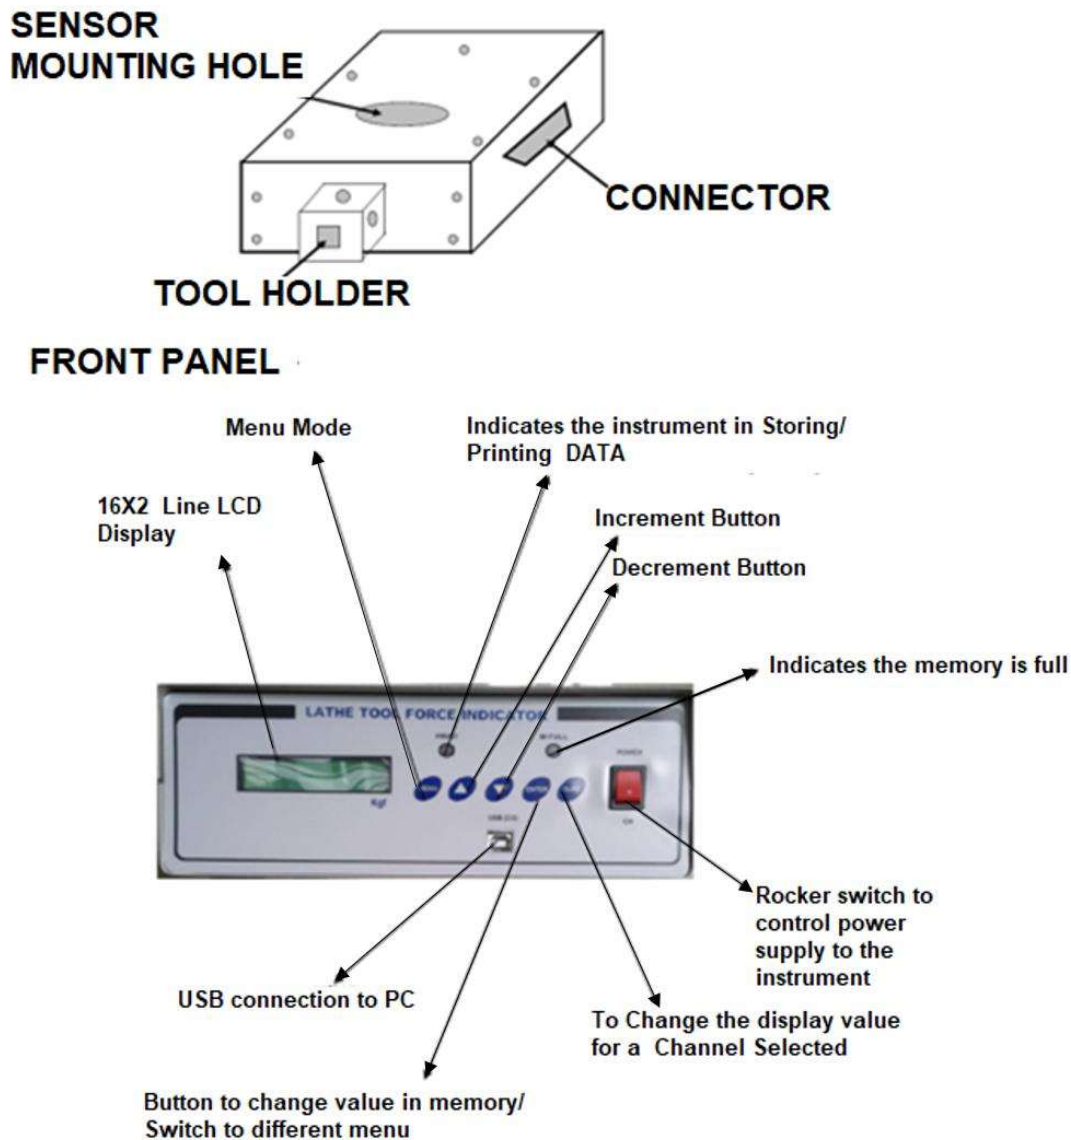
Lathe dynamometer (supplied by M/s Testmaster)
